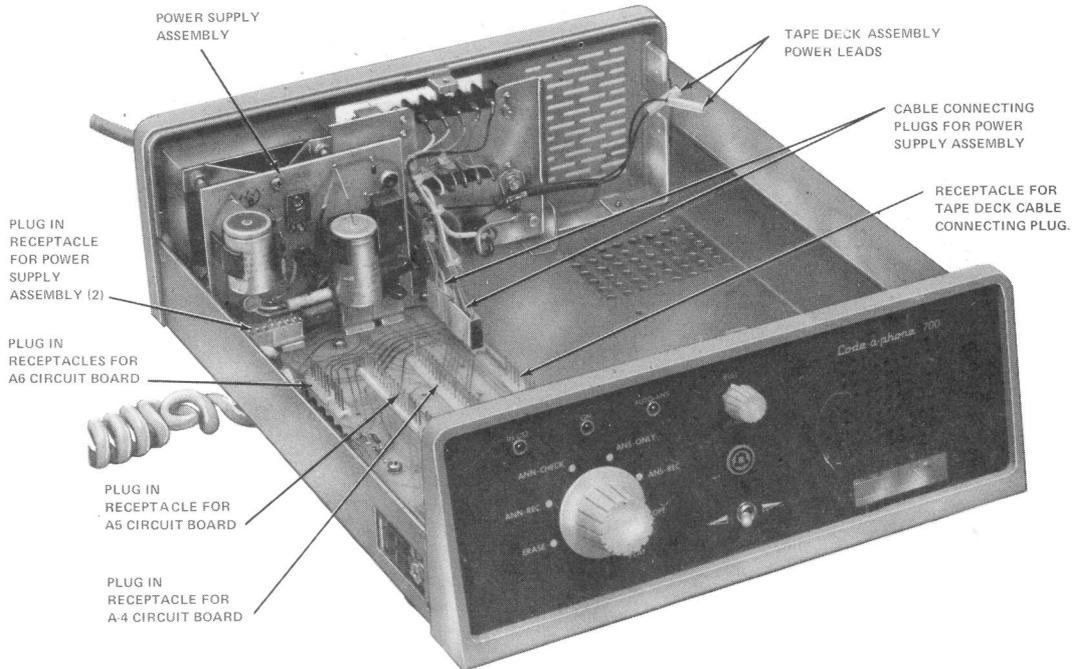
Top Cover, Circuit Boards and Tape Deck Removed
